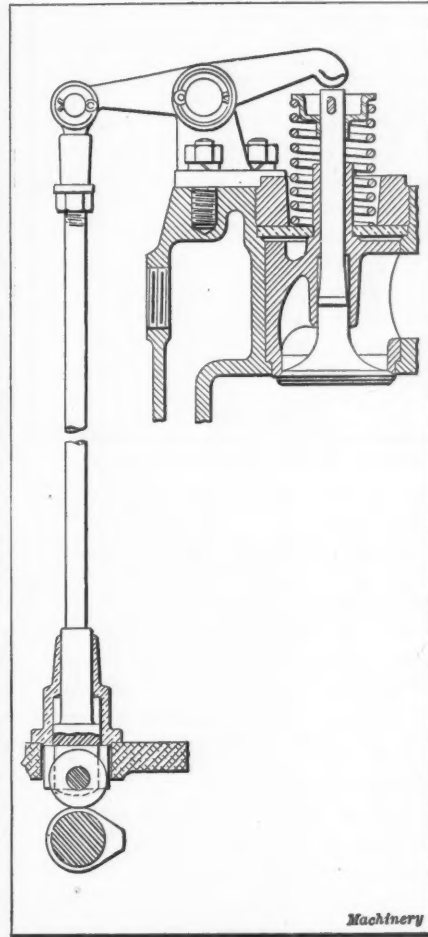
Section through Valve of a Poppet Valve Engine of the Overhead Type
